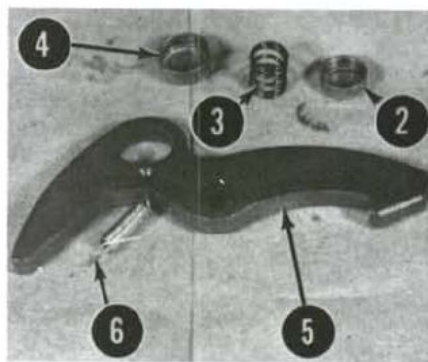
Disassembled view of pawl (5), engaging brake (2, 3 & 4) and return spring (6). Refer to Fig. 20 or 21 for correct installed position.
